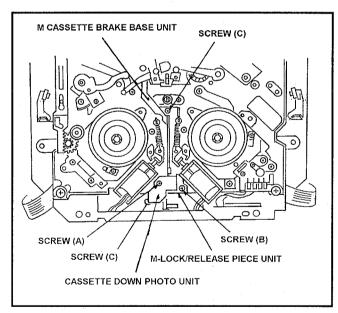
Removal of M Cassette Brake Base Unit
